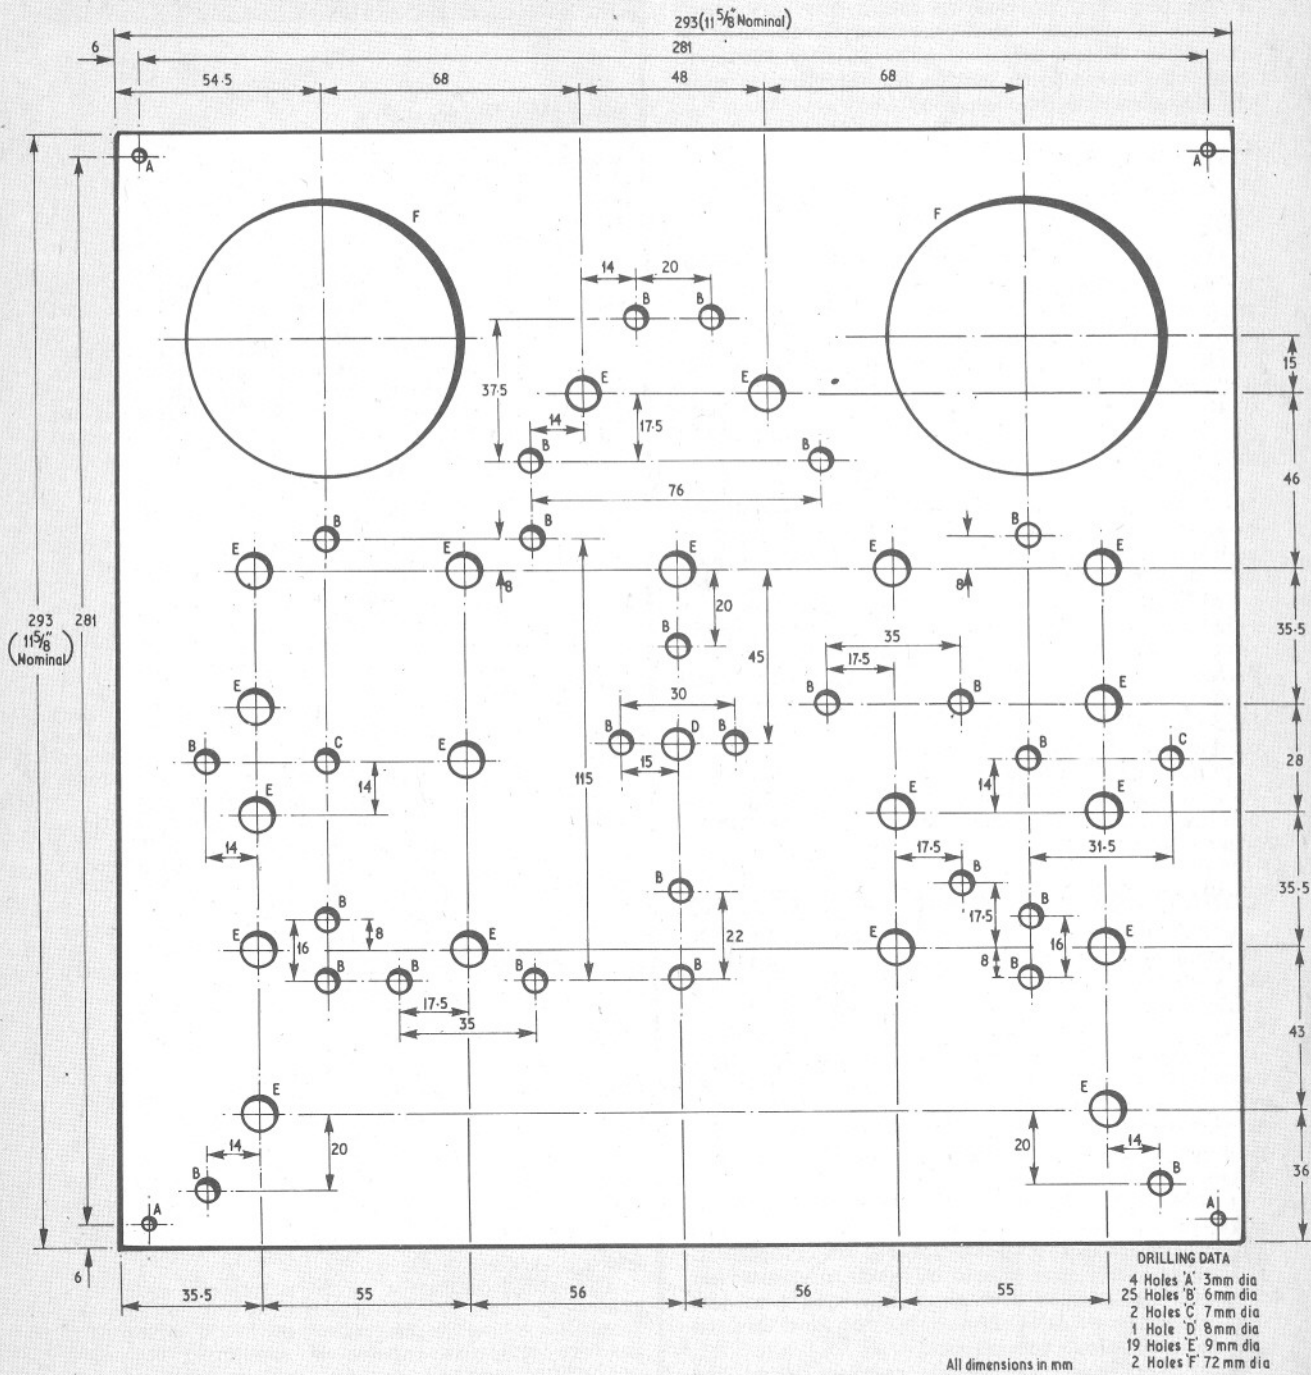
Details of the front panel drilling required for use with scheme shown in block form in Fig. 1.1
